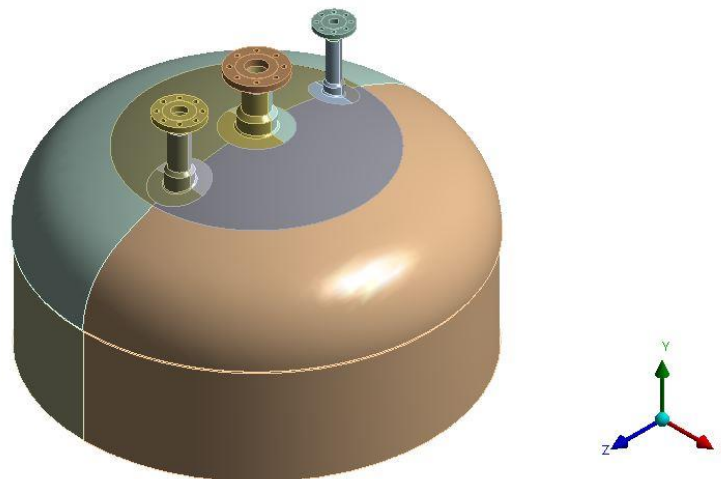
3D CAD model of T2,V1 & SV1 Nozzle
